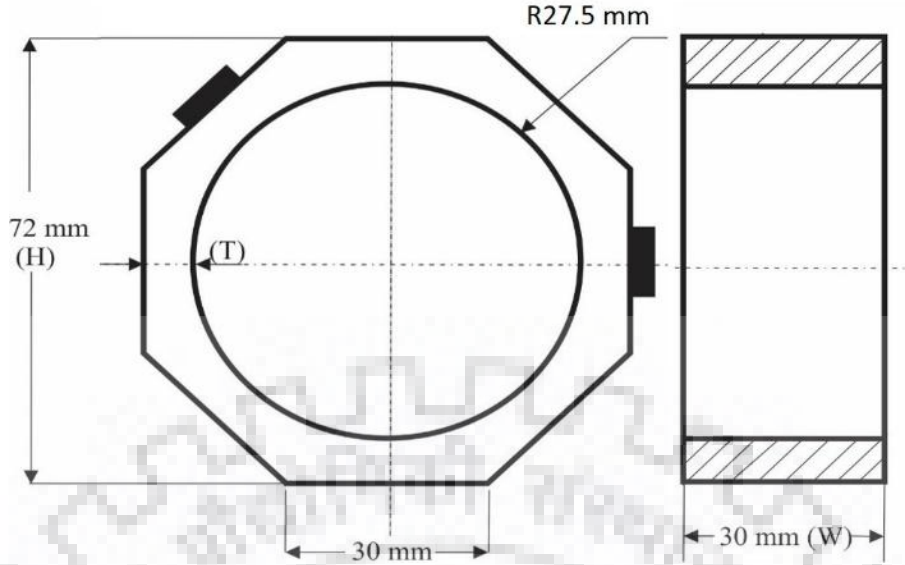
Dimensions of strain ring and strain gauge mounting
